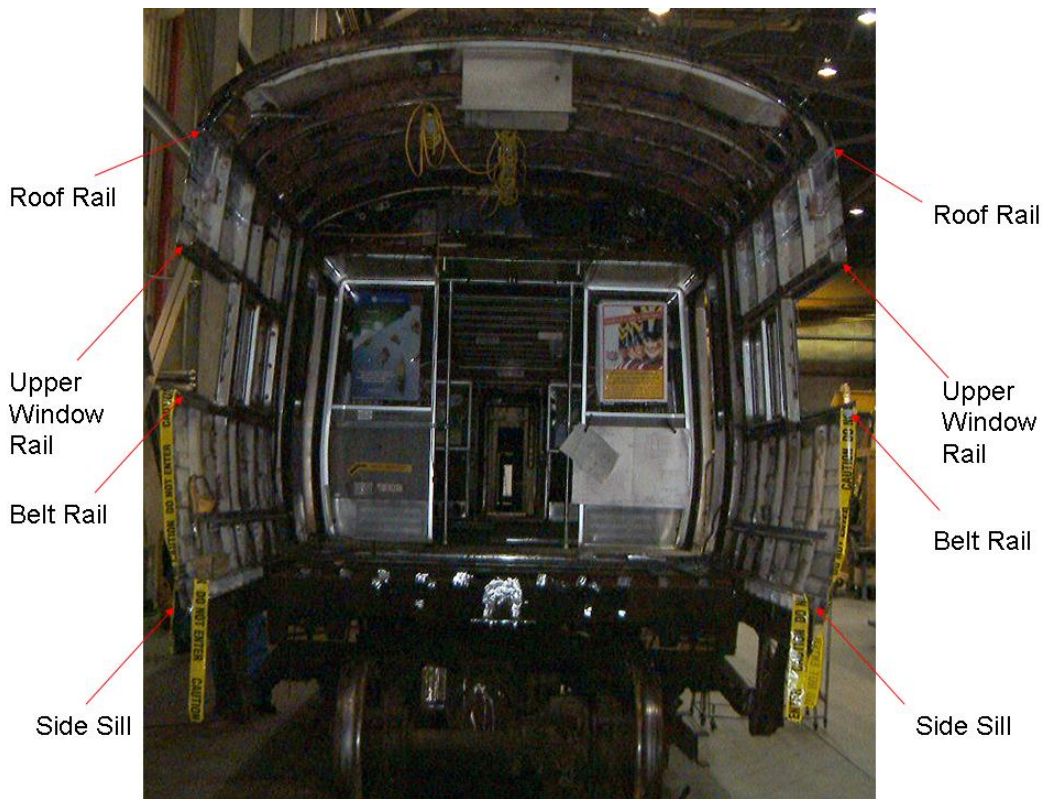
Cross-section View Showing Typical Railcar Superstructure Members
